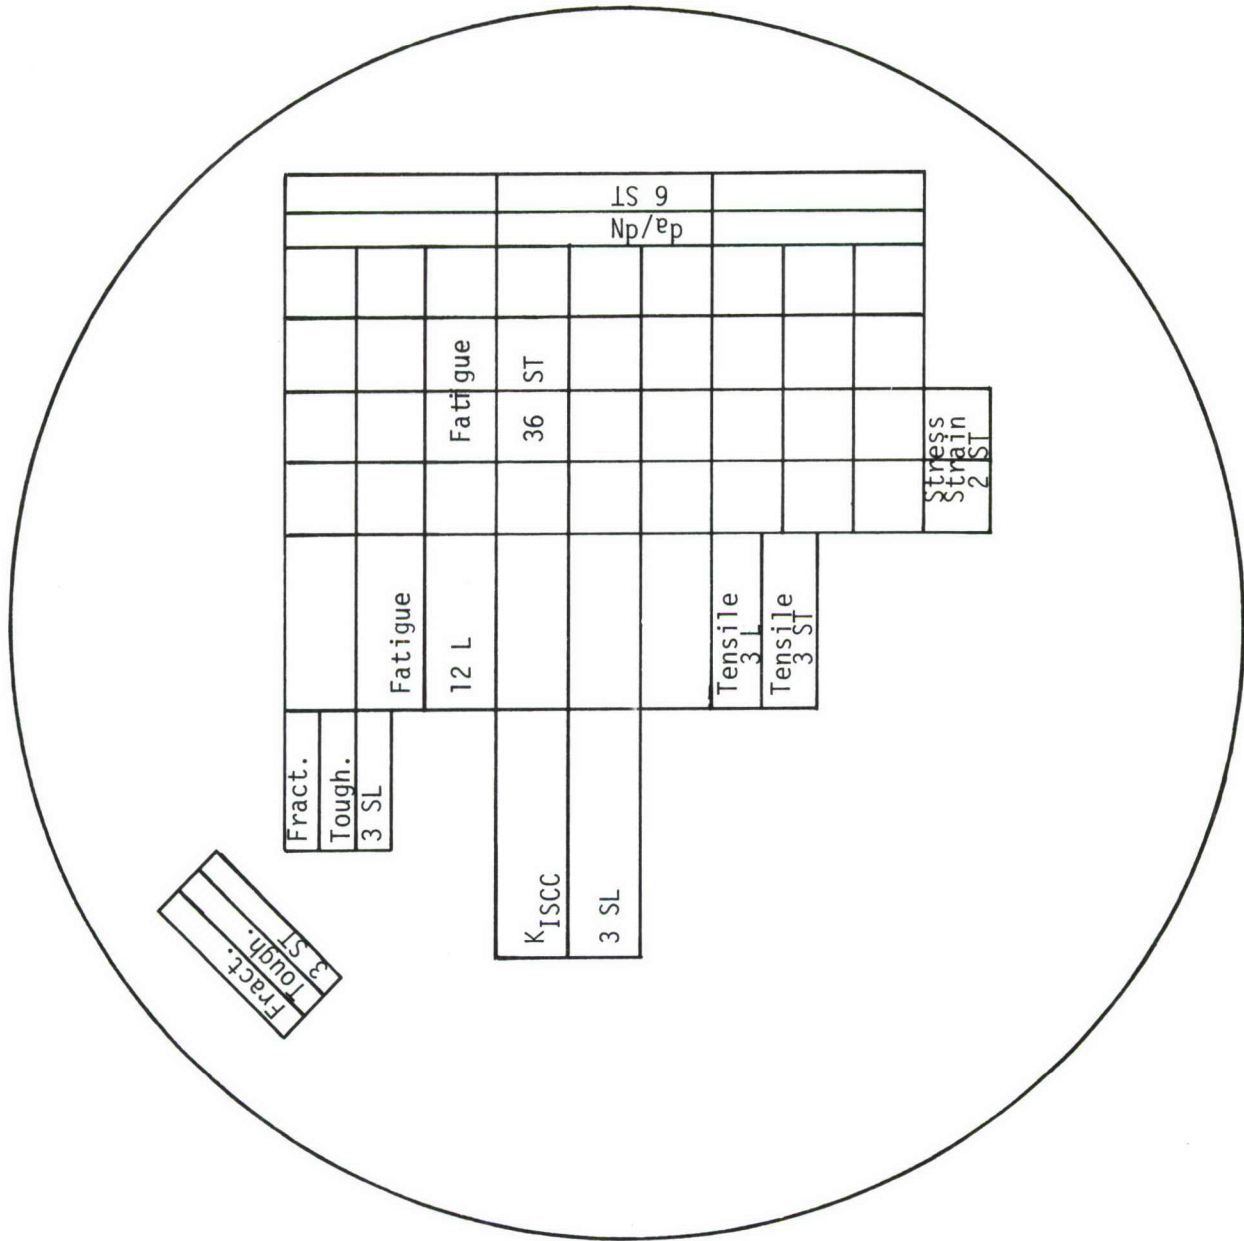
Specimen Layout for BCL/AFML Heat 9, Pancake Forging
